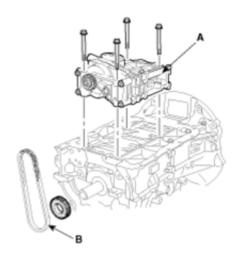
Identifying Oil Pump/Balance Shaft Module & Balance Shaft Chain (2.4 BSM) Courtesy of KIA MOTORS AMERICA, INC.
